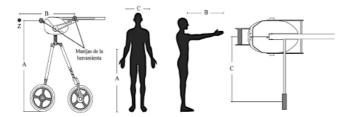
New Oil Palm Cutting Tool (Parra et al., 2018)
